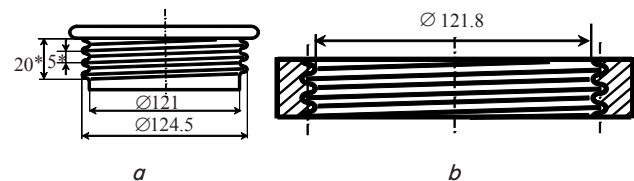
Geometric dimensions of a special-profile fuse: a – sketch of threaded hole in the ATM shell that hosts a fuse; b – fuse
